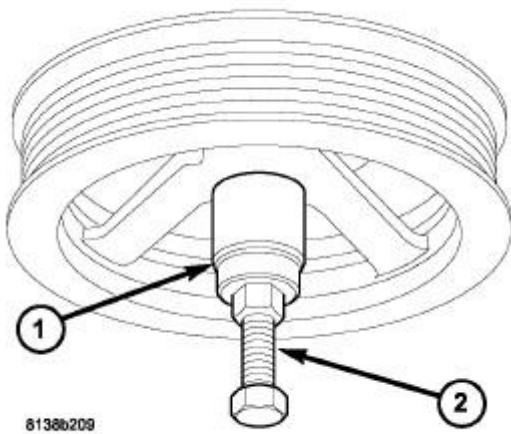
CRANKSHAFT DAMPER - INSTALLATION
